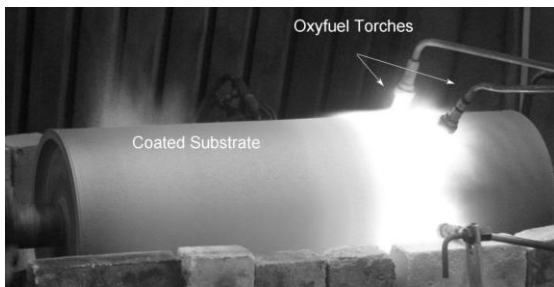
Flame fusing a cylindrical roller which has been deposited with Ni-based alloy
